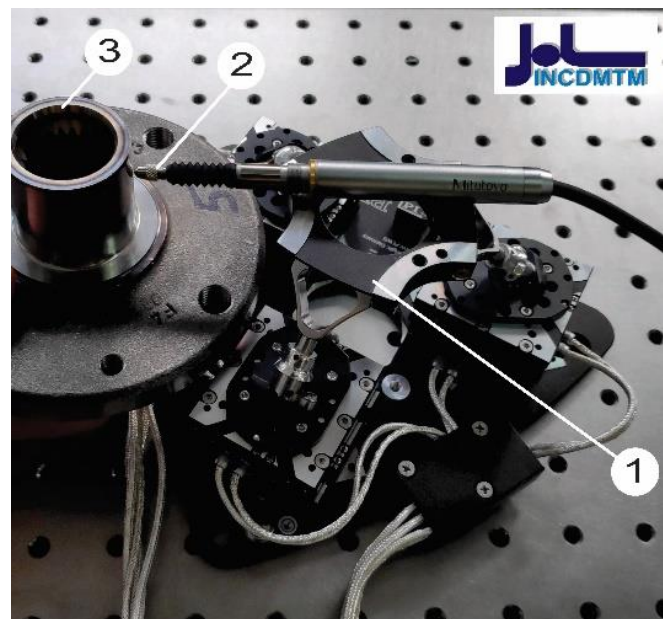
Measurement process with mechatronic system and transducer – view 2
